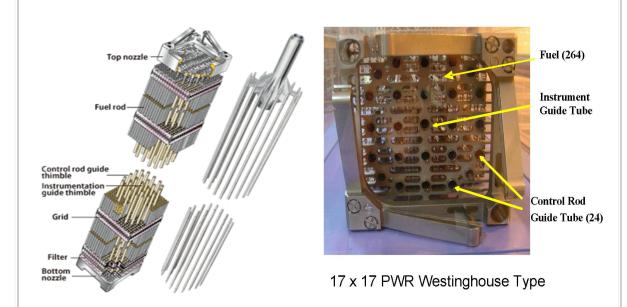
A schematic diagram of a pressurized water reactor fuel assembly, control rod assembly and top view of a 17x17PWR Westinghouse type fuel assembly.
